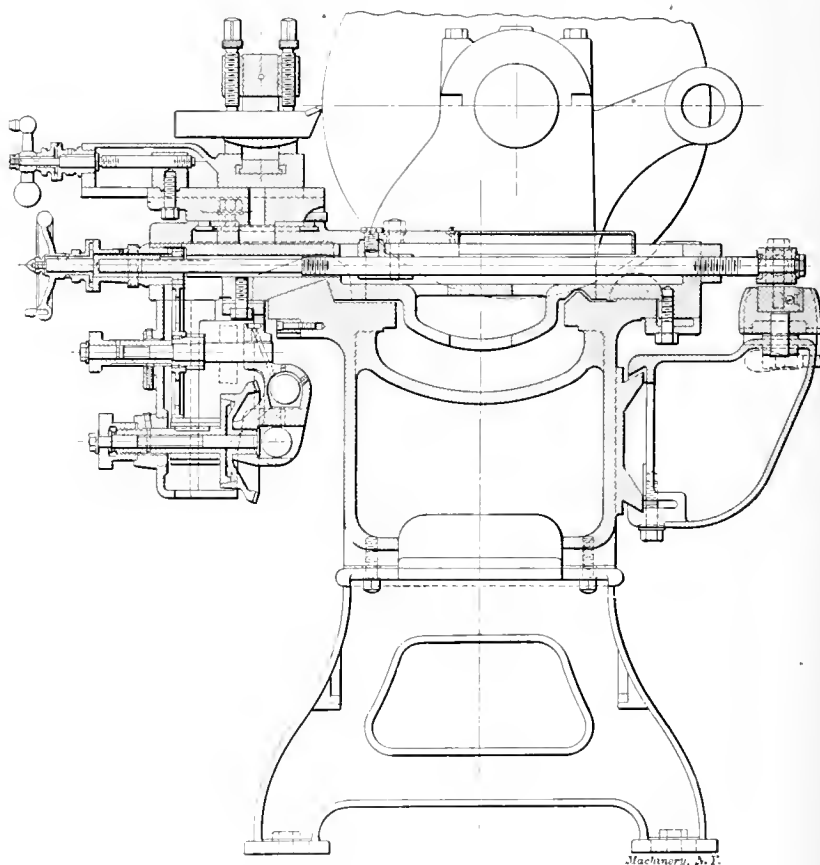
Cross-section through Bed, Carriage and Apron of Le Blond Lathe
